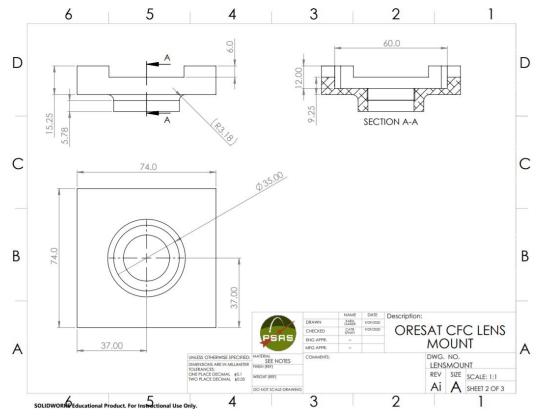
1 of 2 Dimensioned Drawing of the OreSat CFC Mount
